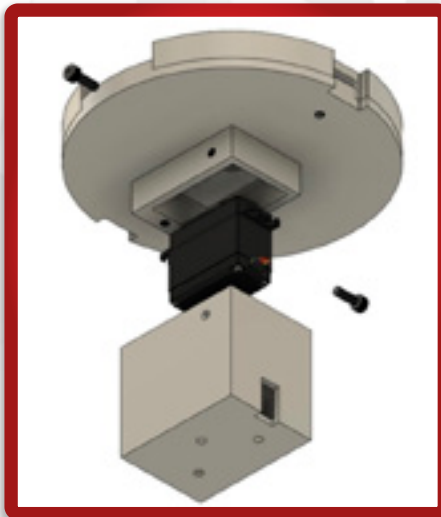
SECURING SERVO MOTOR MOUNT TO THE TOP PLATE
